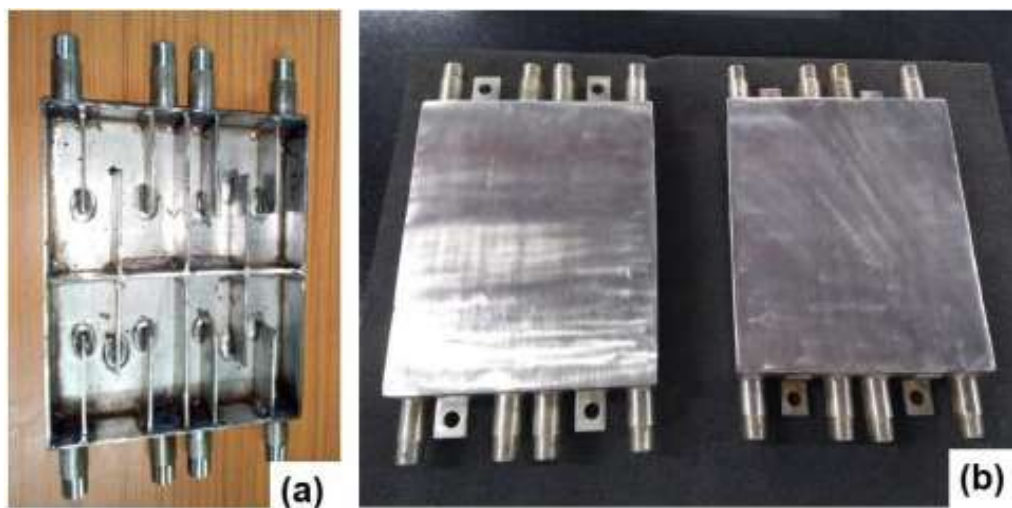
Actual image of the (a) baffles in the cooler plate (b) fabricated cooler plate Pin fin arrangement on the (a) top plate and (b) bottom plate of the heat exchanger
